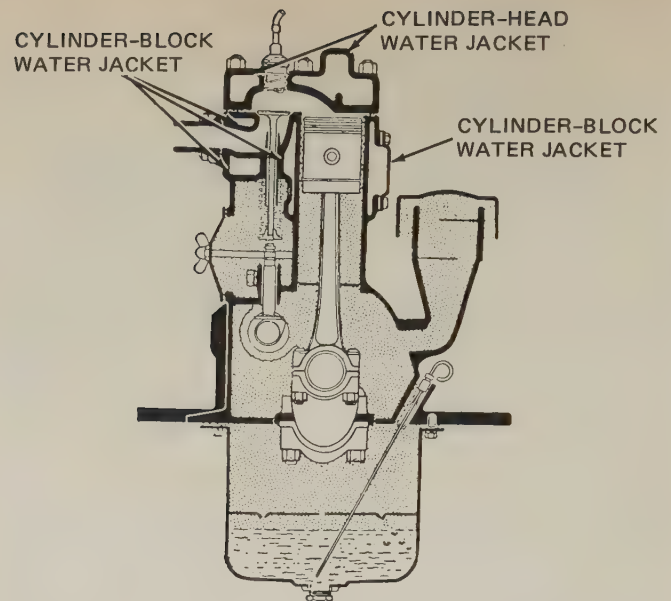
Water jackets in the head and cylinder block of a four-cycle engine.
